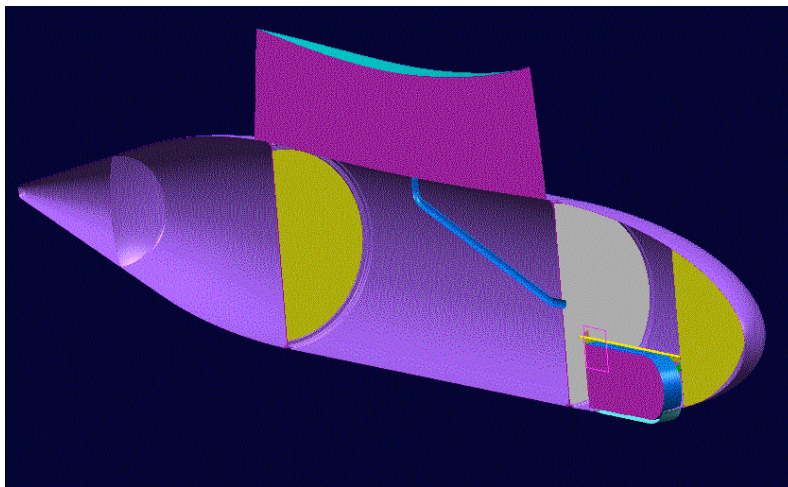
Fuel Tank Mounted SFMR, Cutaway View
